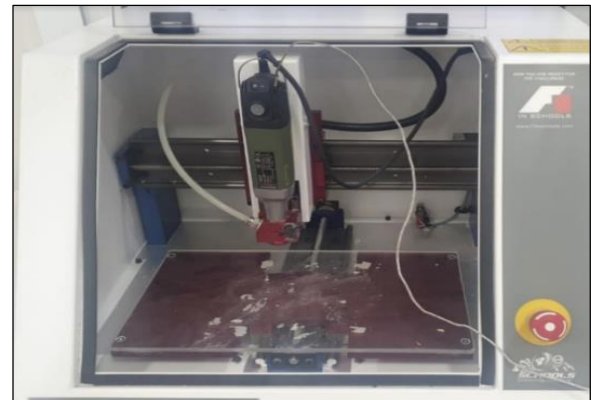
The adjusting workpiece and drill bit are at the drilling machine
